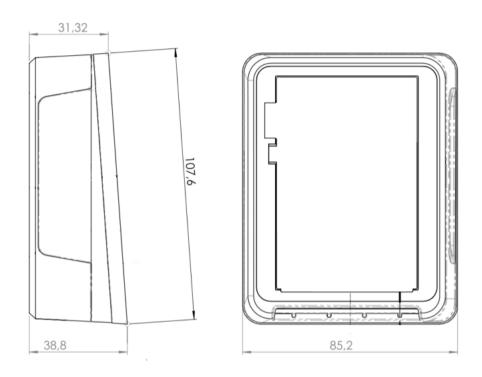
Mechanical dimension of the ALIO Style / ALIO Vend
